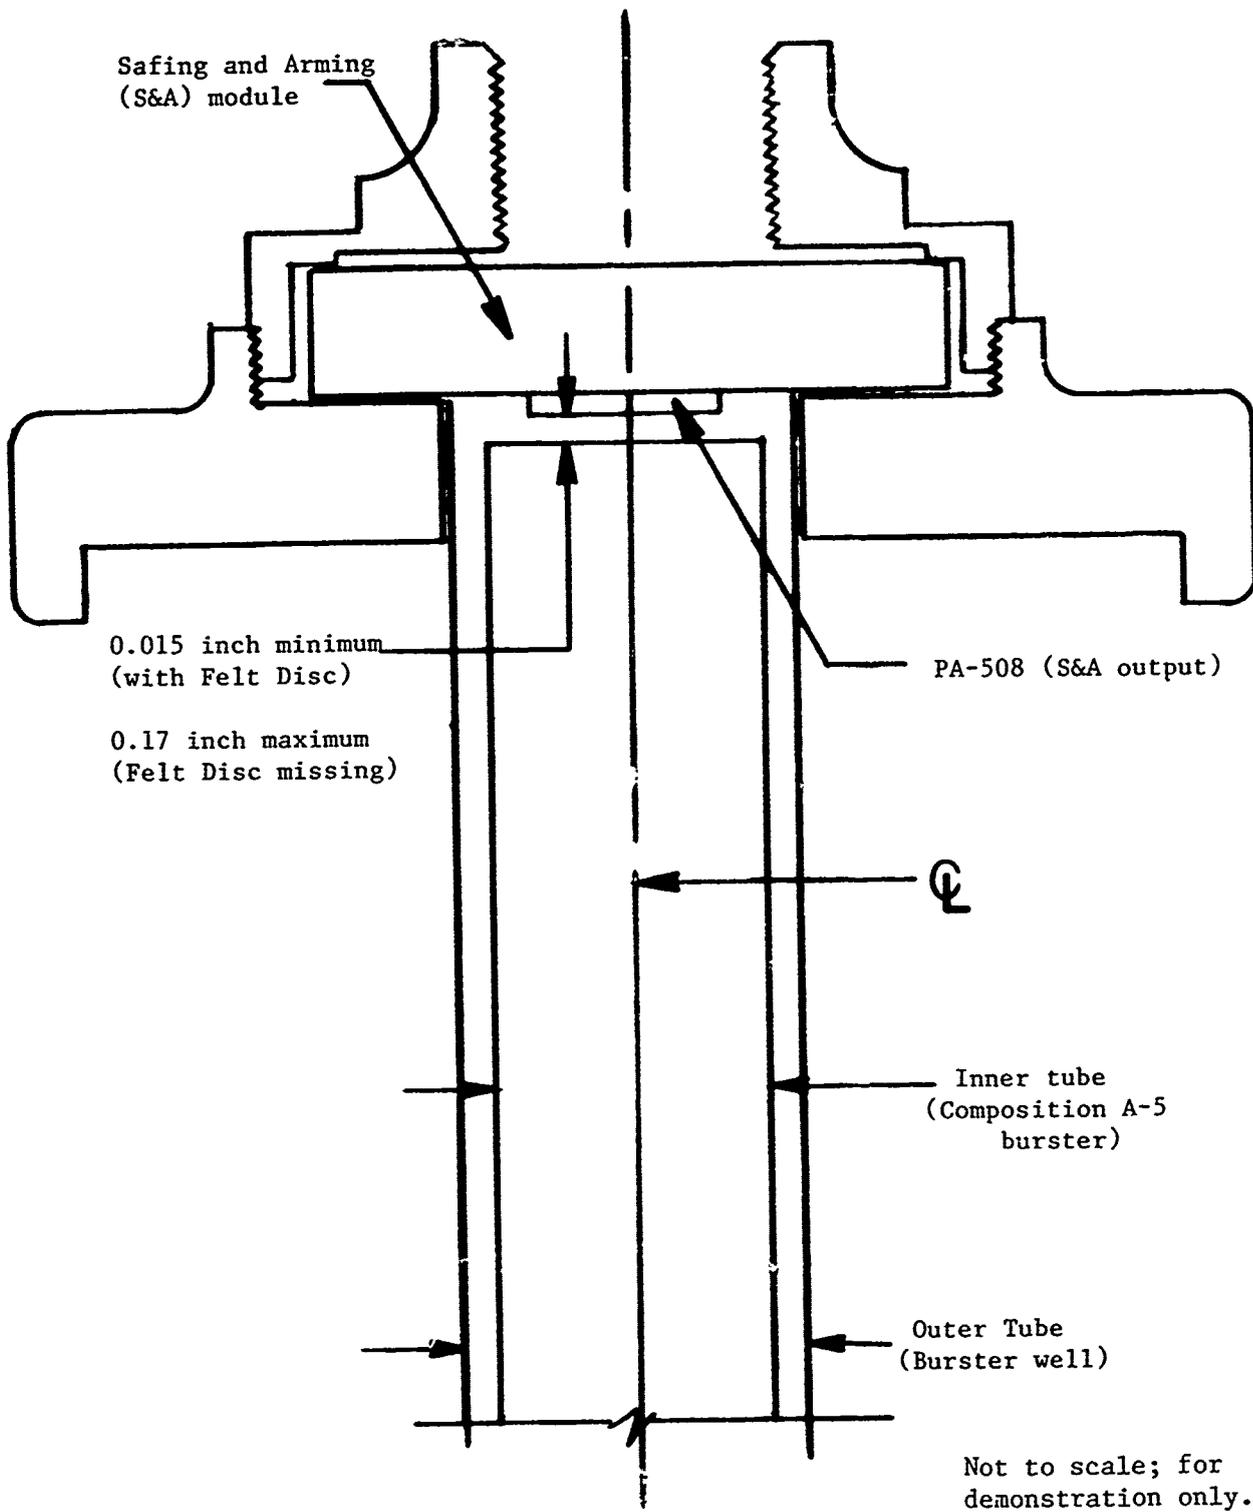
Vertical tolerance M825/M825A1 assembly
